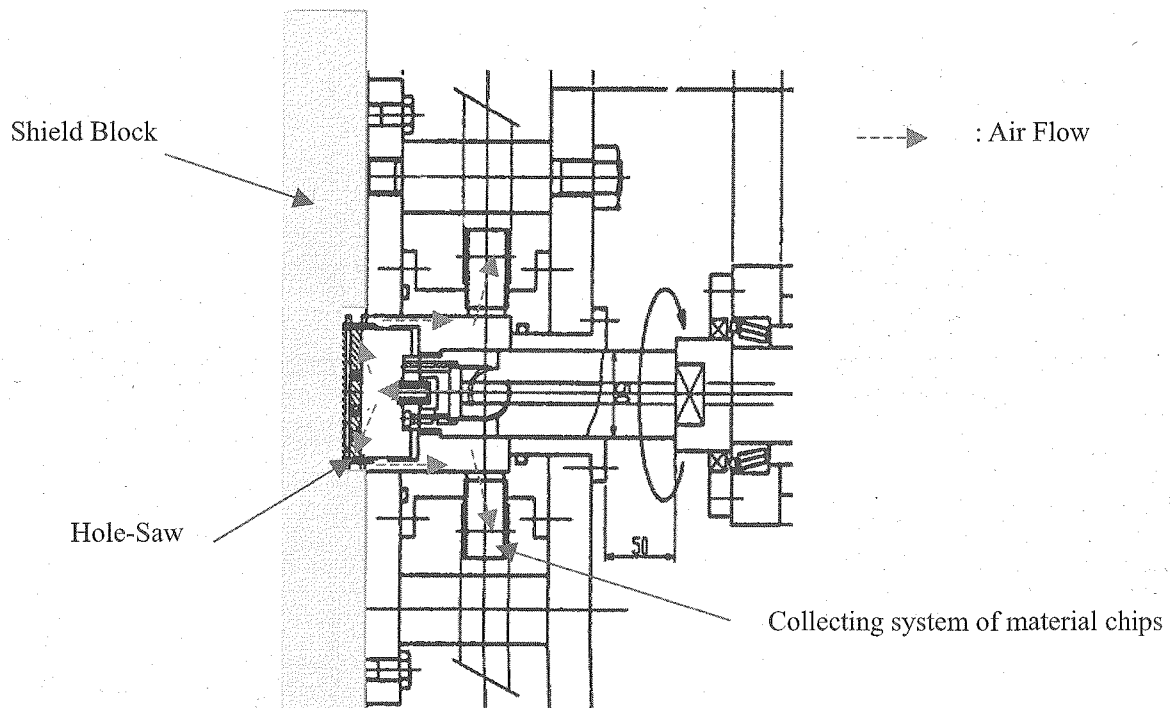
Schematic of Hole-Saw machine applied to the shield block in Hot Cell
